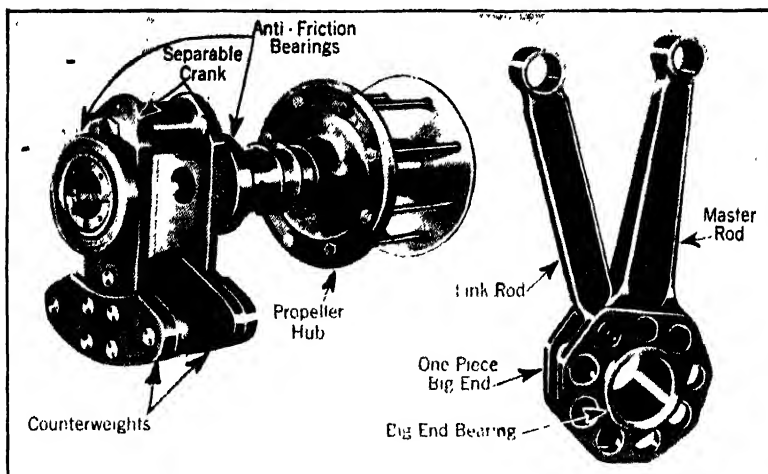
Pratt and Whitney "Wasp" Engine Crankshaft and Two of the Connecting Rods. The Big End of the Master Rod is Made in One Piece, the Crankshaft is a Built-Up Assembly to Permit Installation of Master Rod.
